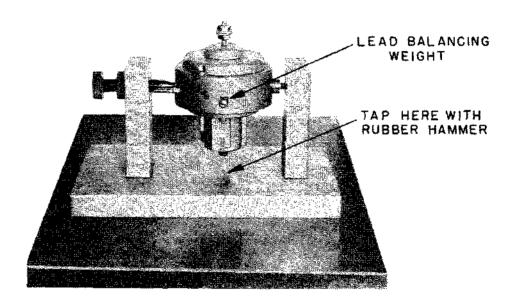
BALANCING THE GYRO HOUSING AND PENDULUK ASSEMBLY, VERTICAL POSITION
